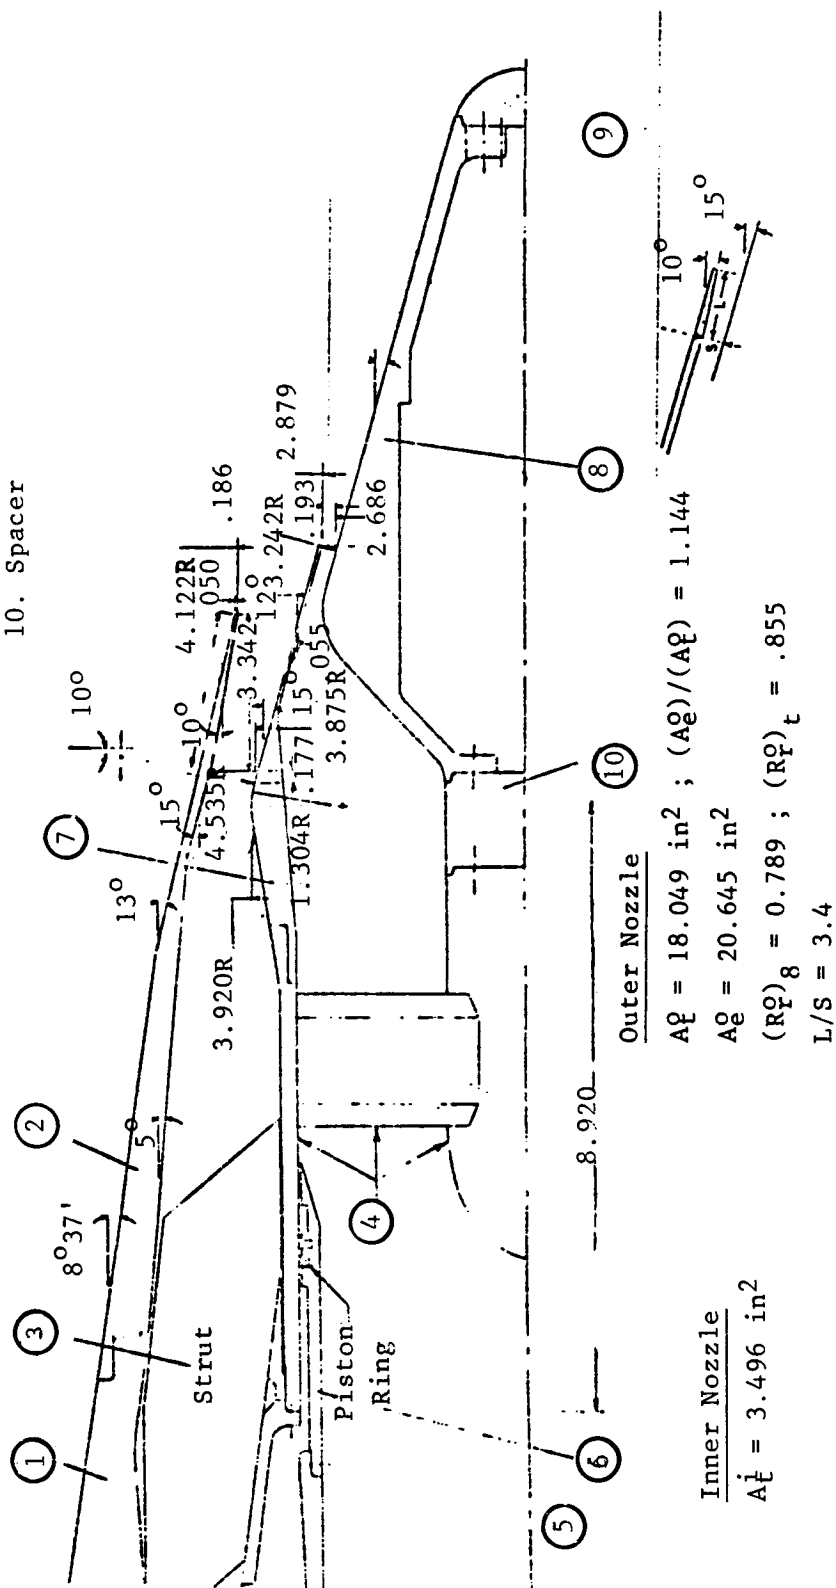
A Schematic of Coannular Nozzle with C-D Outer Stream and Convergent Inner Stream (Model 9.2).
